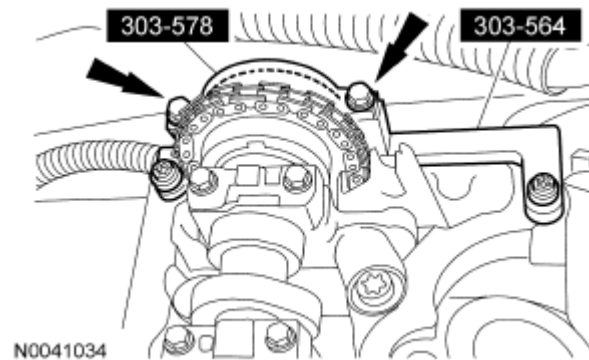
Identifying Special Tools And Top Clamp Bolts
